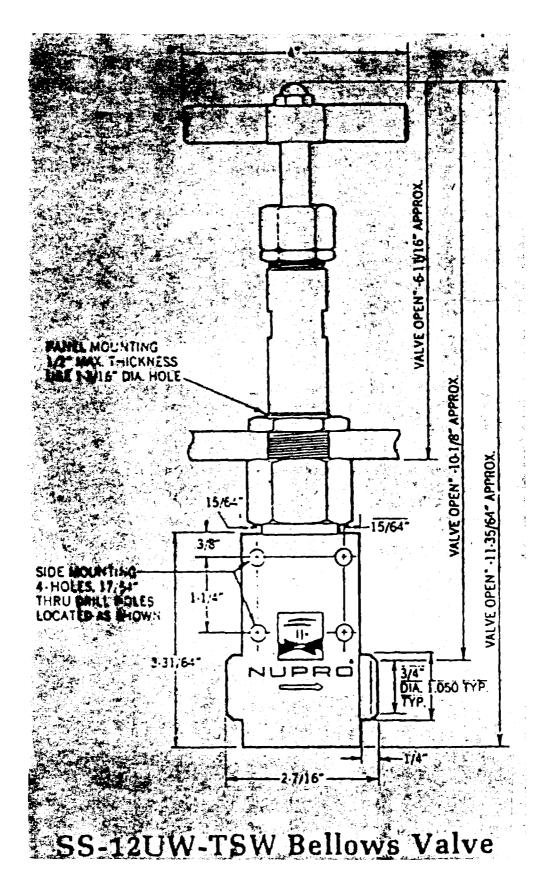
HV-606, 607, 656,, 657. Nupro Drawing.
